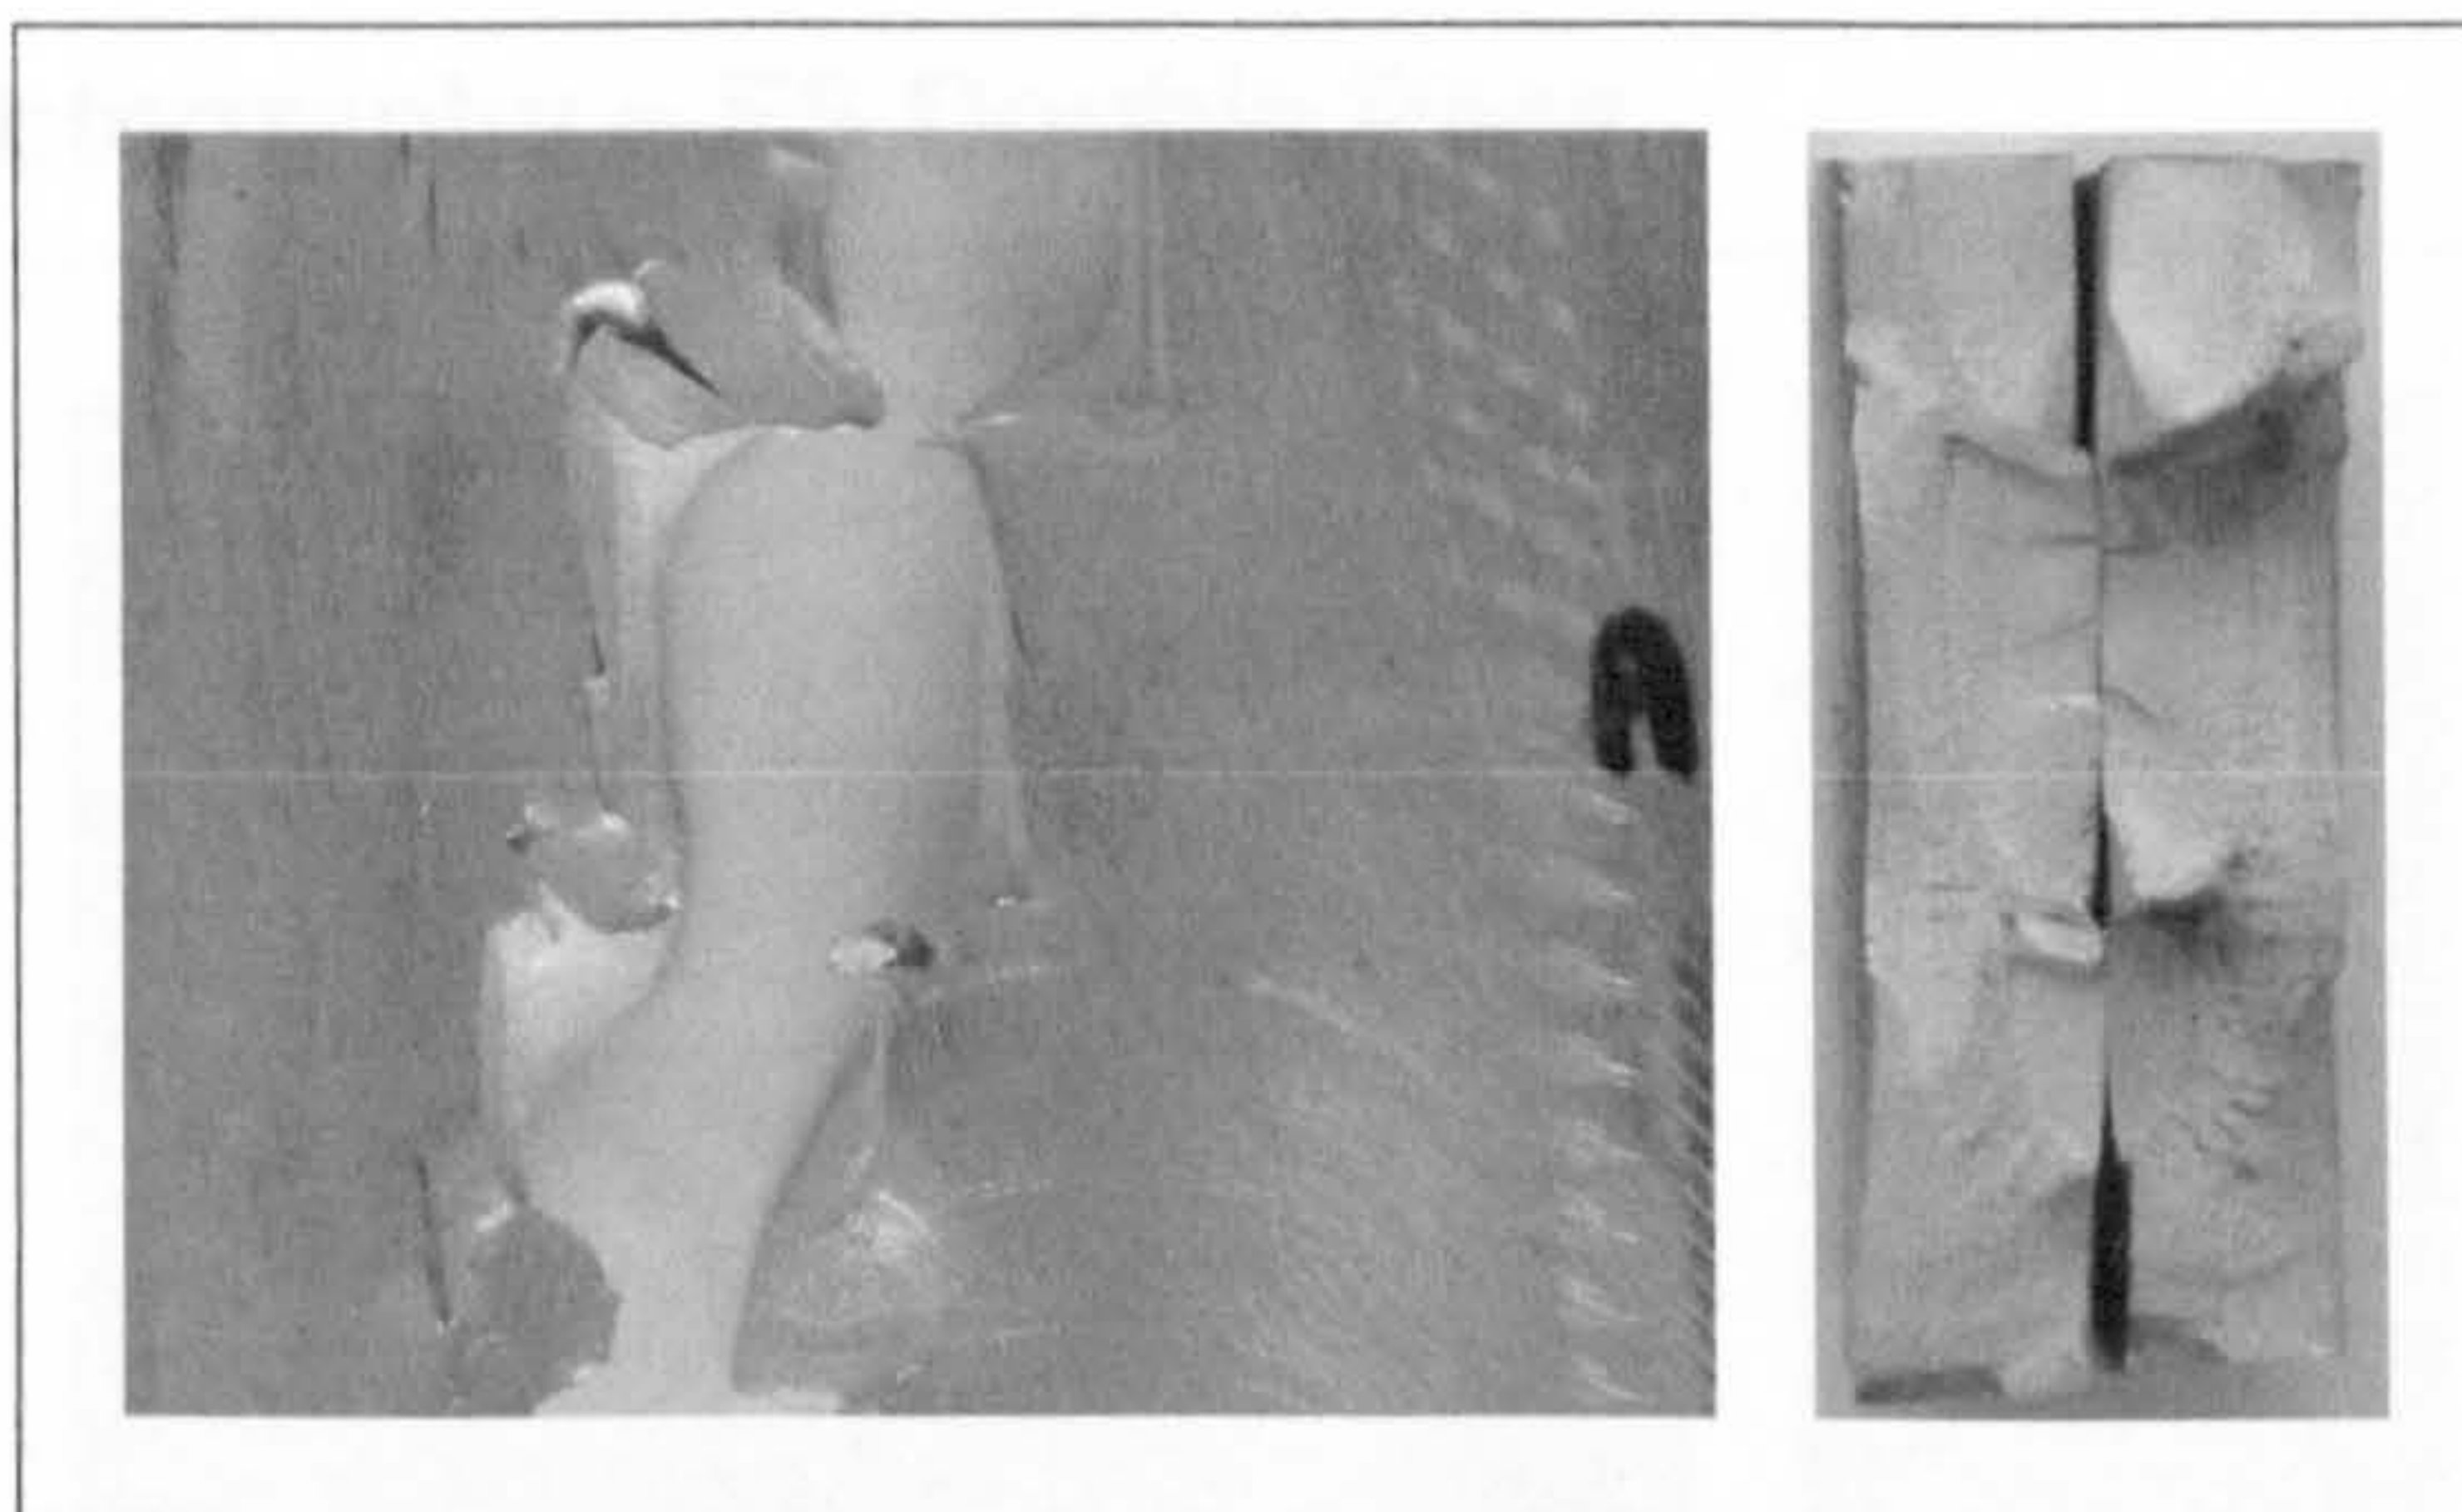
Multiple initiation crack sites (left) and fracture surfaces (right), (FS SP 4).
